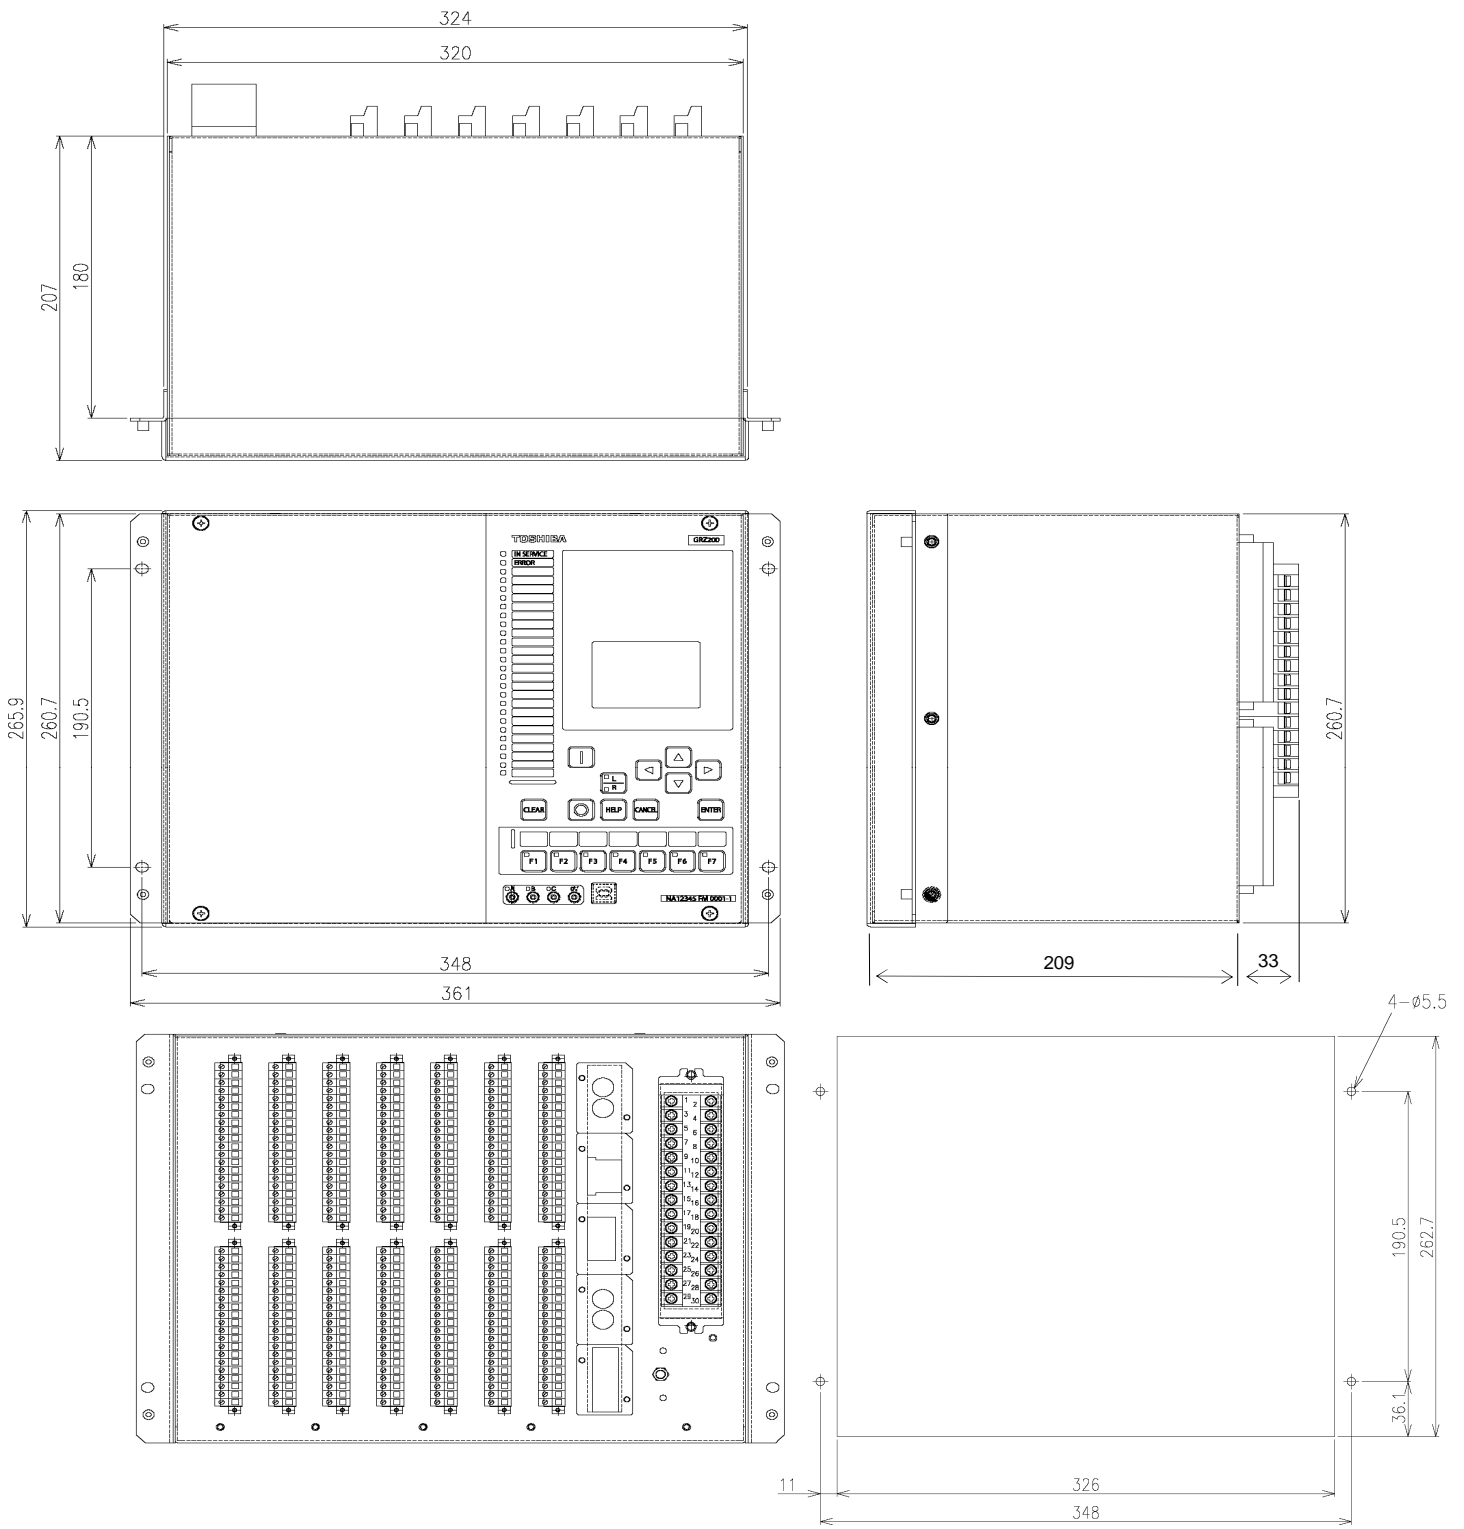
Dimension and Panel Cut-out – 3/4 x 19" case size
